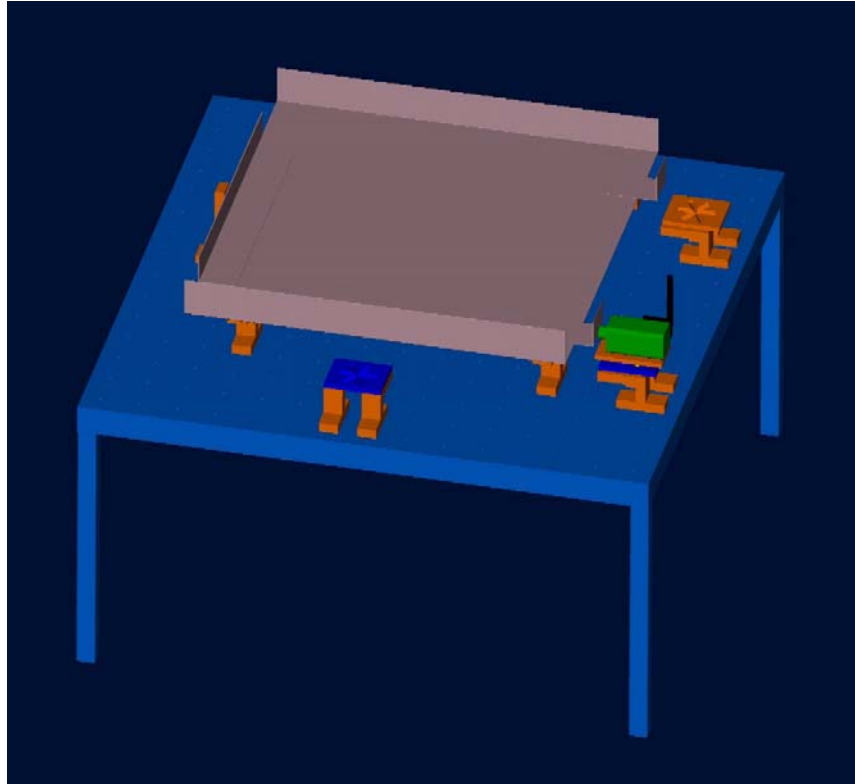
Model of wireless measurement tool kinematically coupled to groove plate on body subassembly welding fixture.
